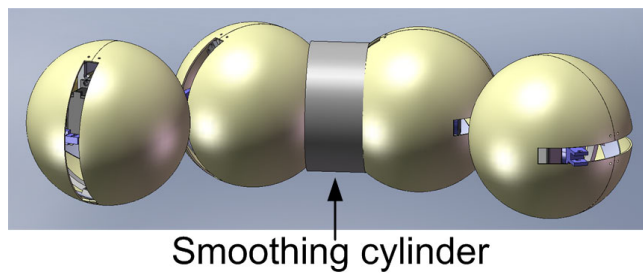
Installing a thin cylinder between each joint module will further smoothen the exterior surface of the snake robot.
